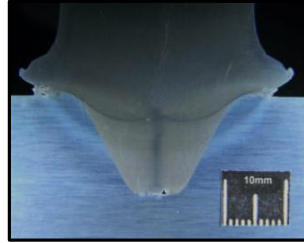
Macros of FHPF welds in AA 6082-T6 Aluminium
